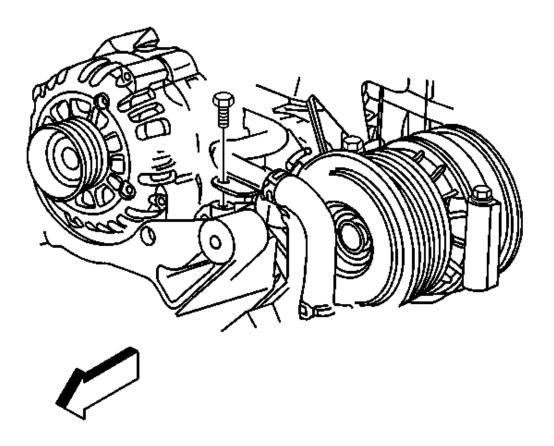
View Of Heater Outlet Hose Clip Bolt Courtesy of GENERAL MOTORS CORP.
